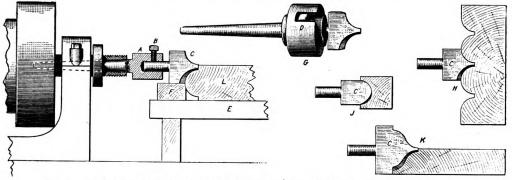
Molding Arrangement for Lathe and Method of Overcoming Danger of Exposed Bolt Heads.
